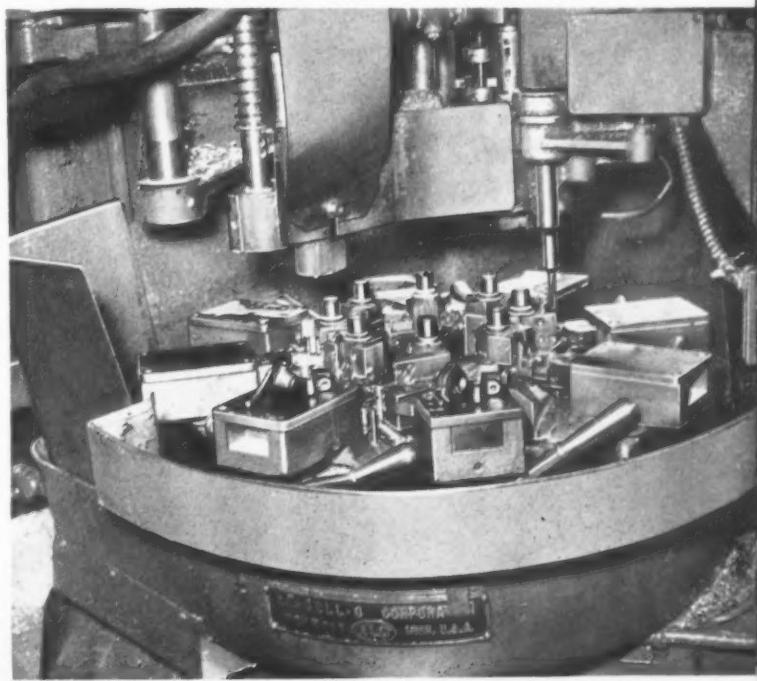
Fixture Employed in a Countersinking Operation, which is Equipped with Slides to Strip the Work from the Tools
